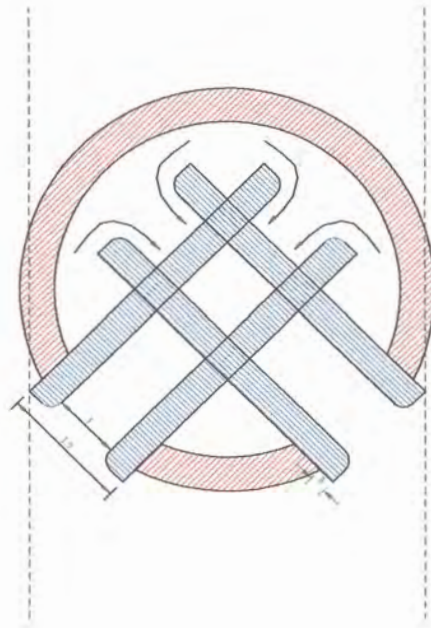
Cross sectional view of the liquid distributor with the inserted micro-tubes.
